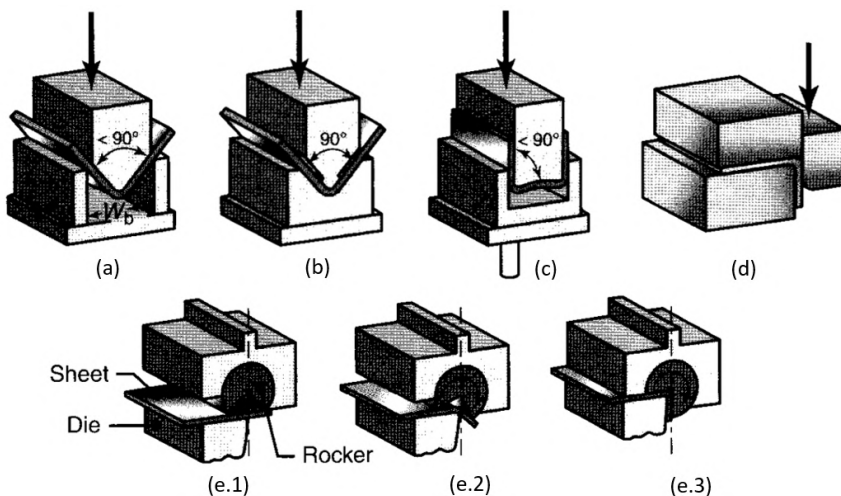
Basic sheet bending processes: (a) air bending, (b) V-bending, (c) U-bending, (d) wiping bending and (e) rotary bending (Kalpakjian and Schmid, 2009).
